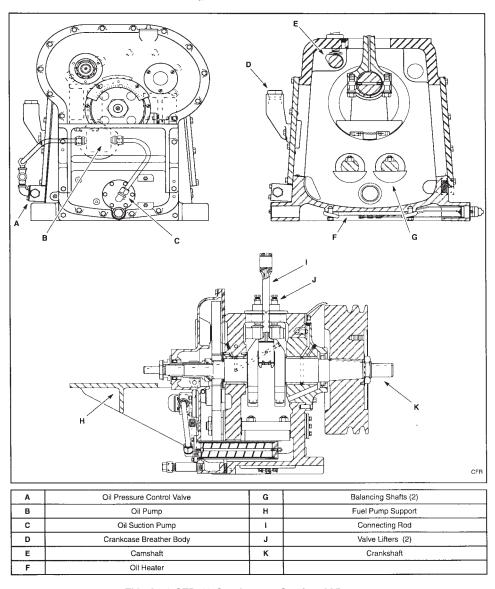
CFR-48 Crankcase—Sectional Views
